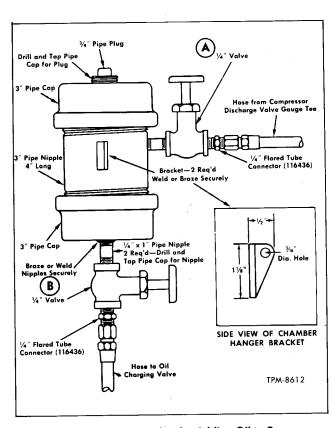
Fabricated Chamber for Adding Oil to Compressor
